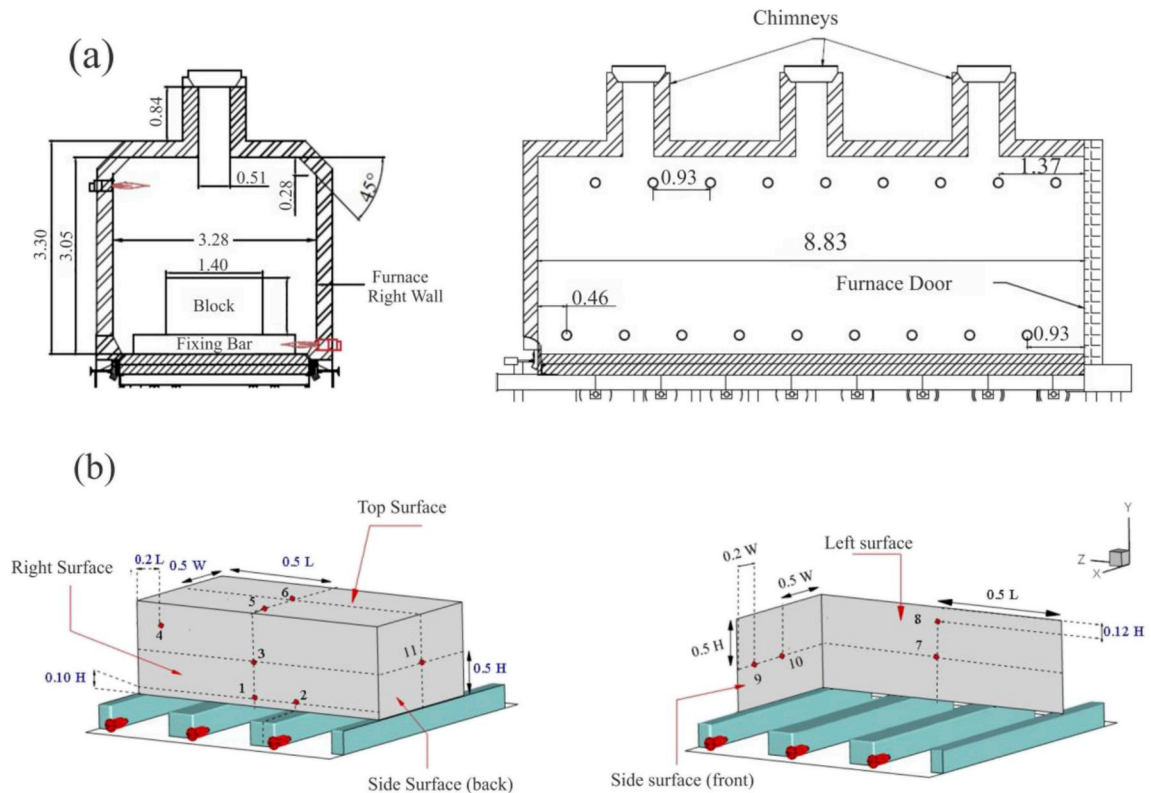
(a) Dimensions and geometry of the car bottom gas-fired furnace and (b) Schematic views of thermocouples locations on the instrumented forged ingot.
